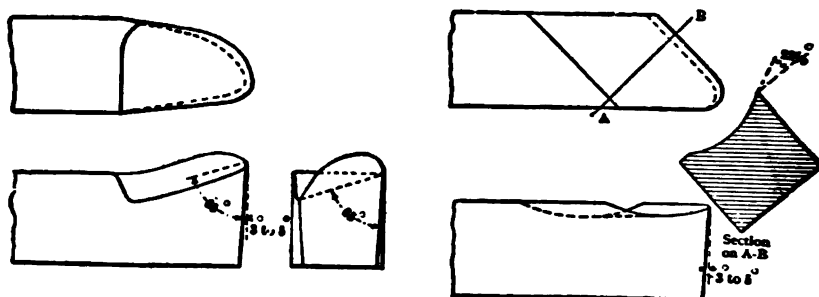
Type of lathe tool much used on the continent, but not equal in efficiency to tools requiring more forging and permitting a greater number of grindings.
